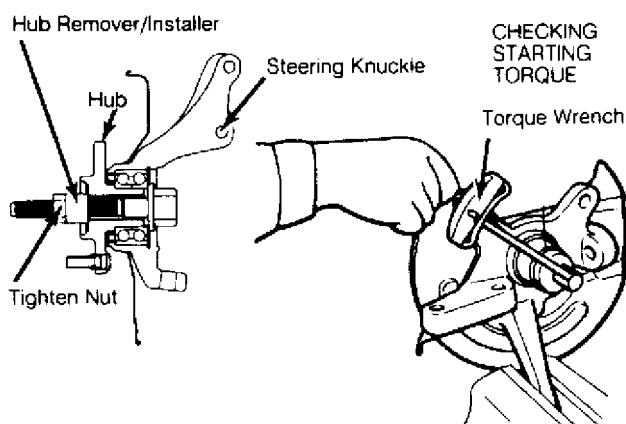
Installing Hub & Checking Bearing Starting Torque
